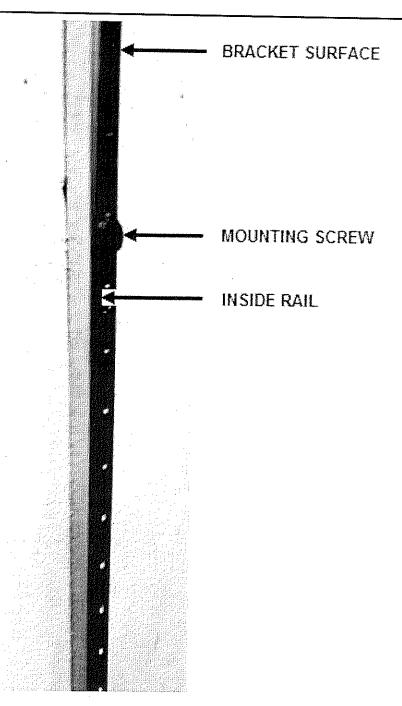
Vacuum Cleaner Station Bracket Mounting Screw Installed Wrong
